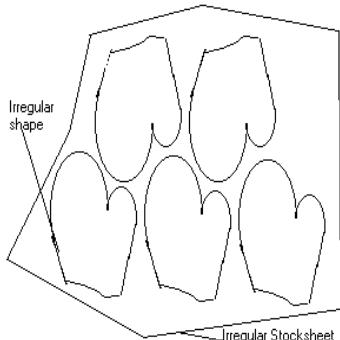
Cutting of Irregular Parts from an Irregular Stock Sheet
